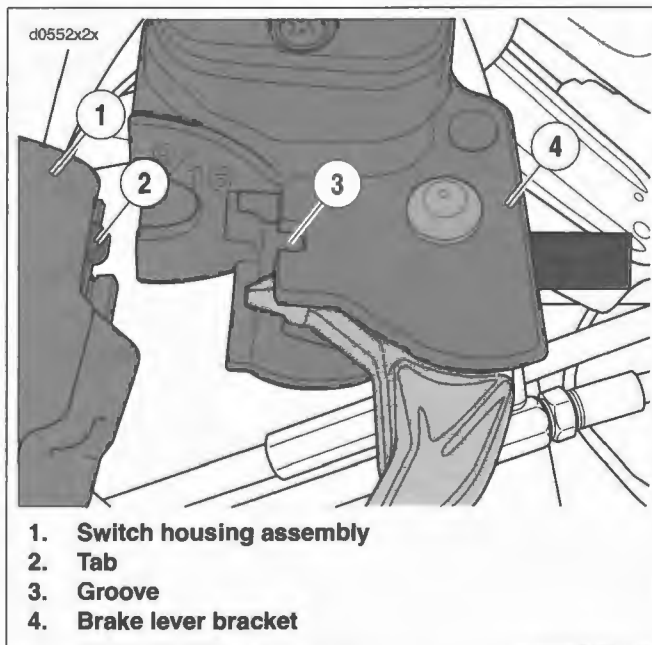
Attach Master Cylinder To Right Handlebar Switches
